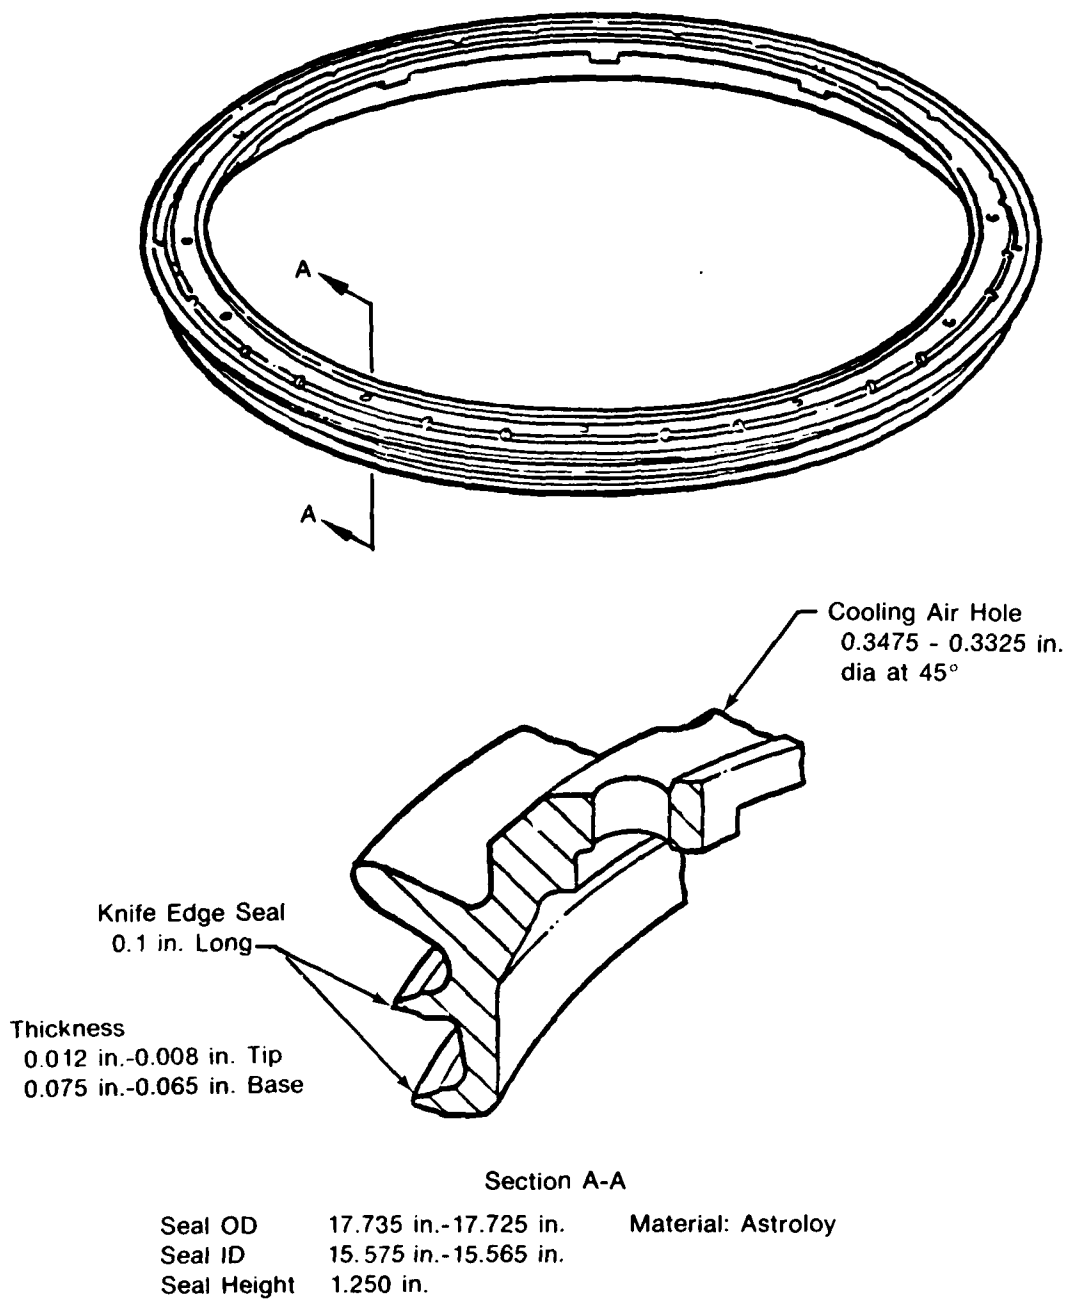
12-13 High Pressure Compressor Spacer (P/N 4041591)
